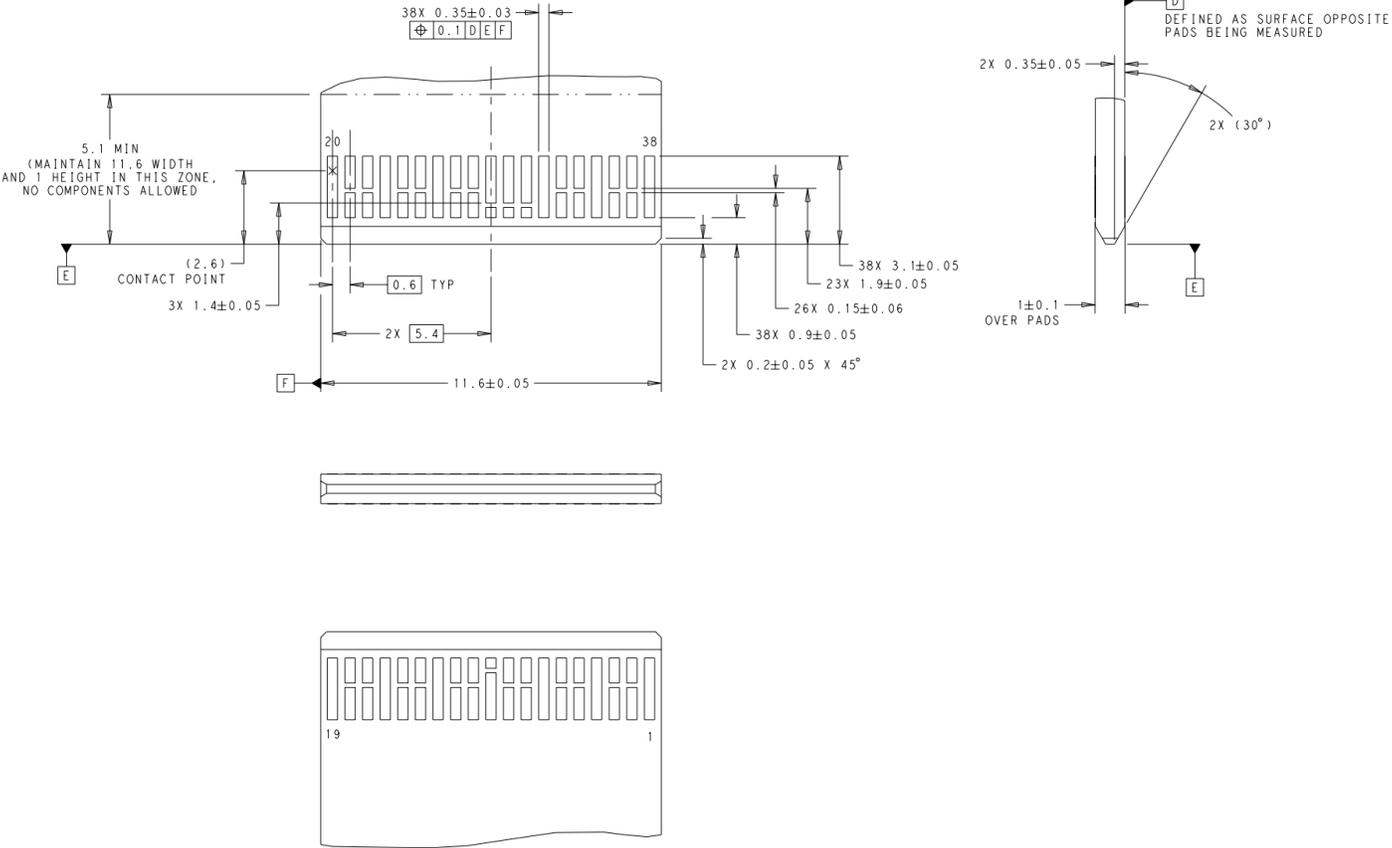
Pattern Layout for microQSFP Printed Circuit Board
